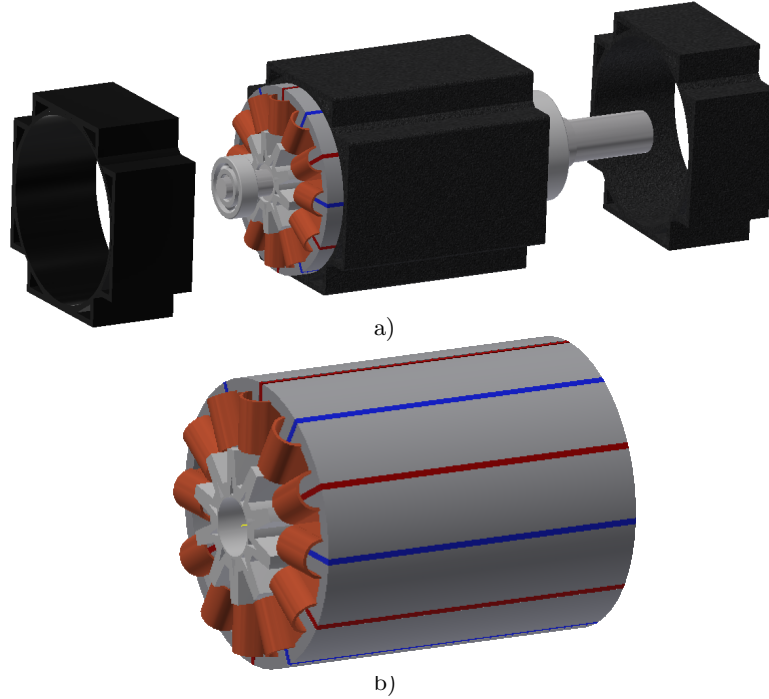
Illustration of the prototype with a) frame, bearings and shaft, and b) motor only.
